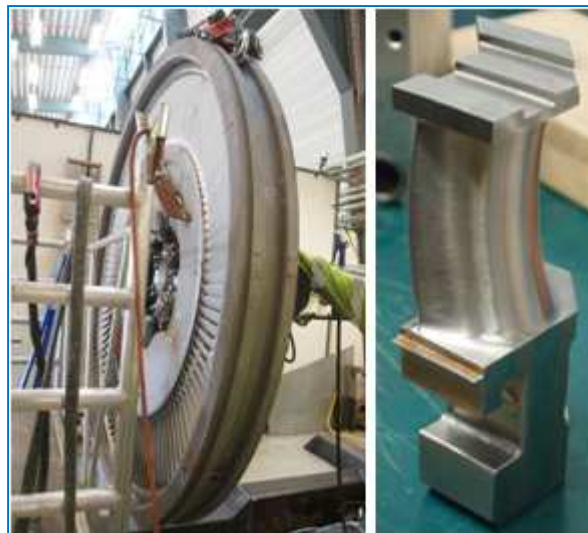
Left, diaphragm from a turbine at Hellisheiði power plant during welding repairs in specially designed equipment. Right, a stator blade for one high pressure steam turbine at Hellisheiði power plant.
